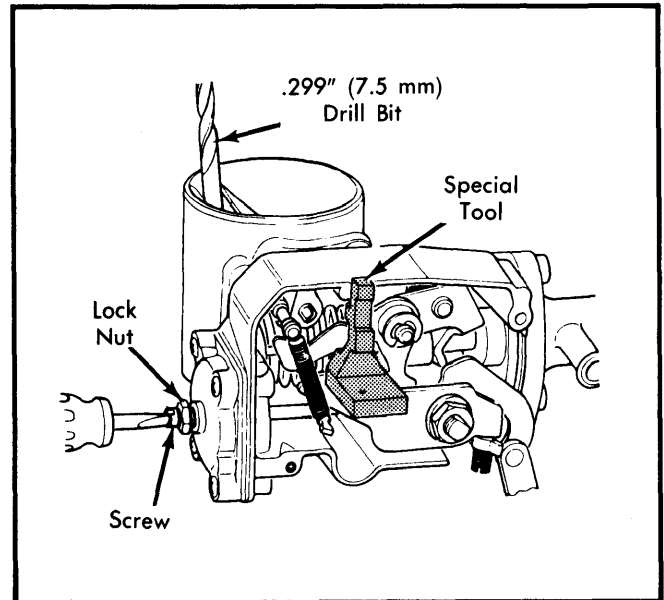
Installing Special Tool for Choke Pull-Down Adjustment
